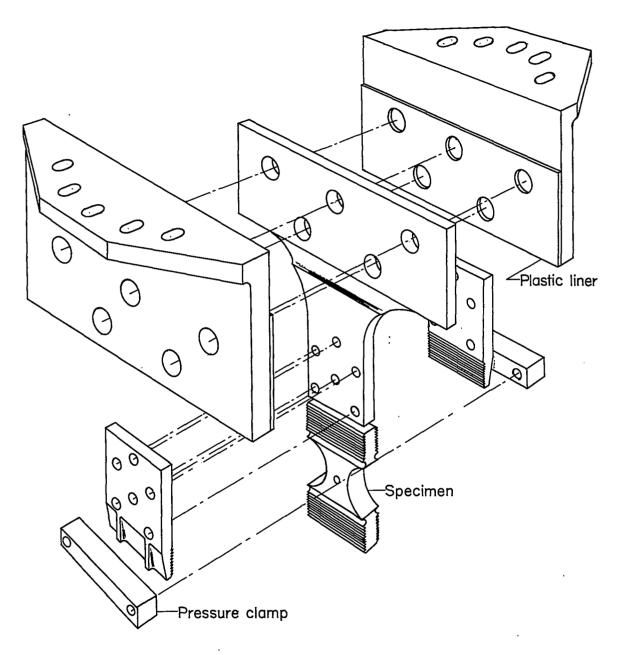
Exploded view of grips and specimen. (Lower grips were identical to those shown.)
